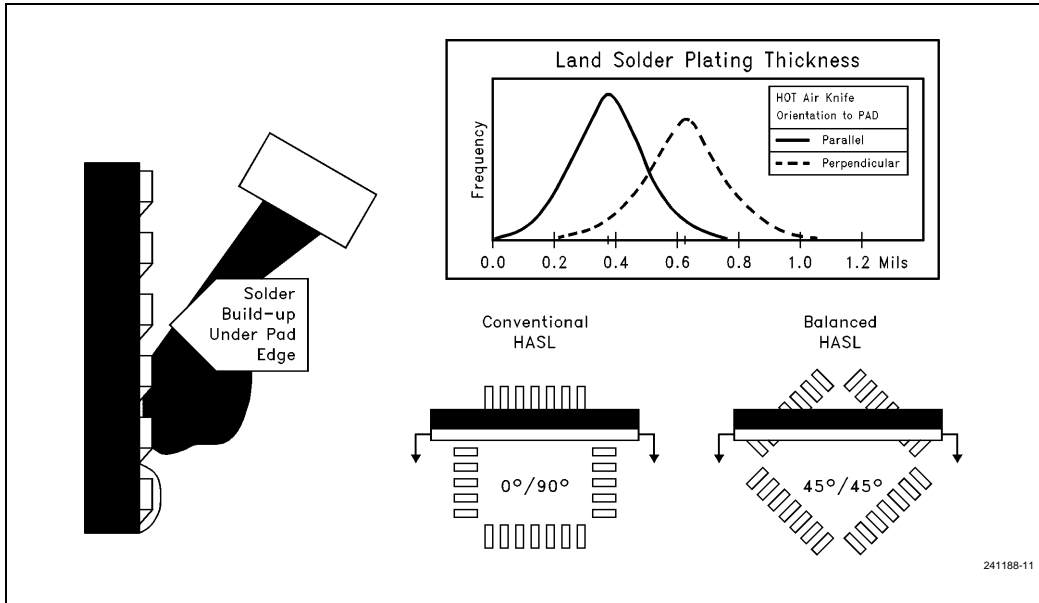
Balance Land Solder Plating Thickness from HASL (Hot Air Solder Leveling) (PWB Fabrication)
